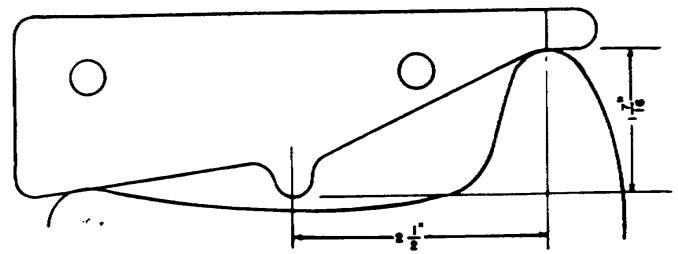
Wheel Having Tread Worn Hollow Defect With Gage in Place.
